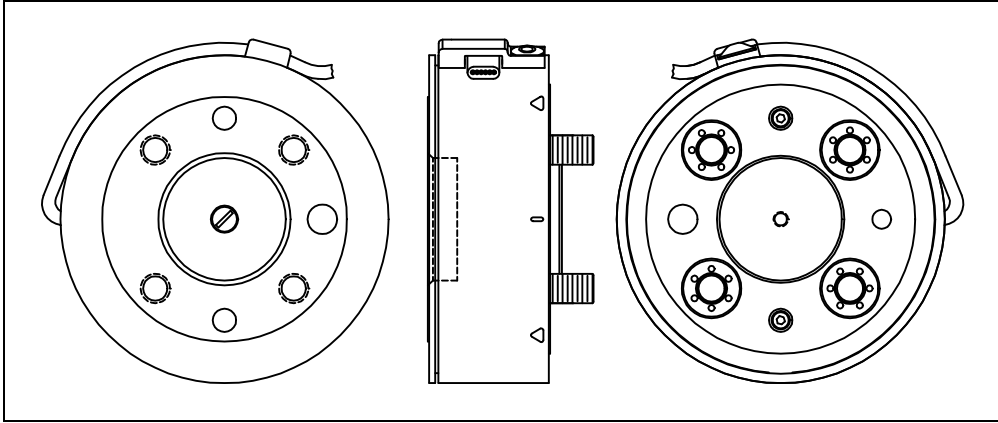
Sensor. The Left View is the Gripper Side. The Right View is the Robot Side.
